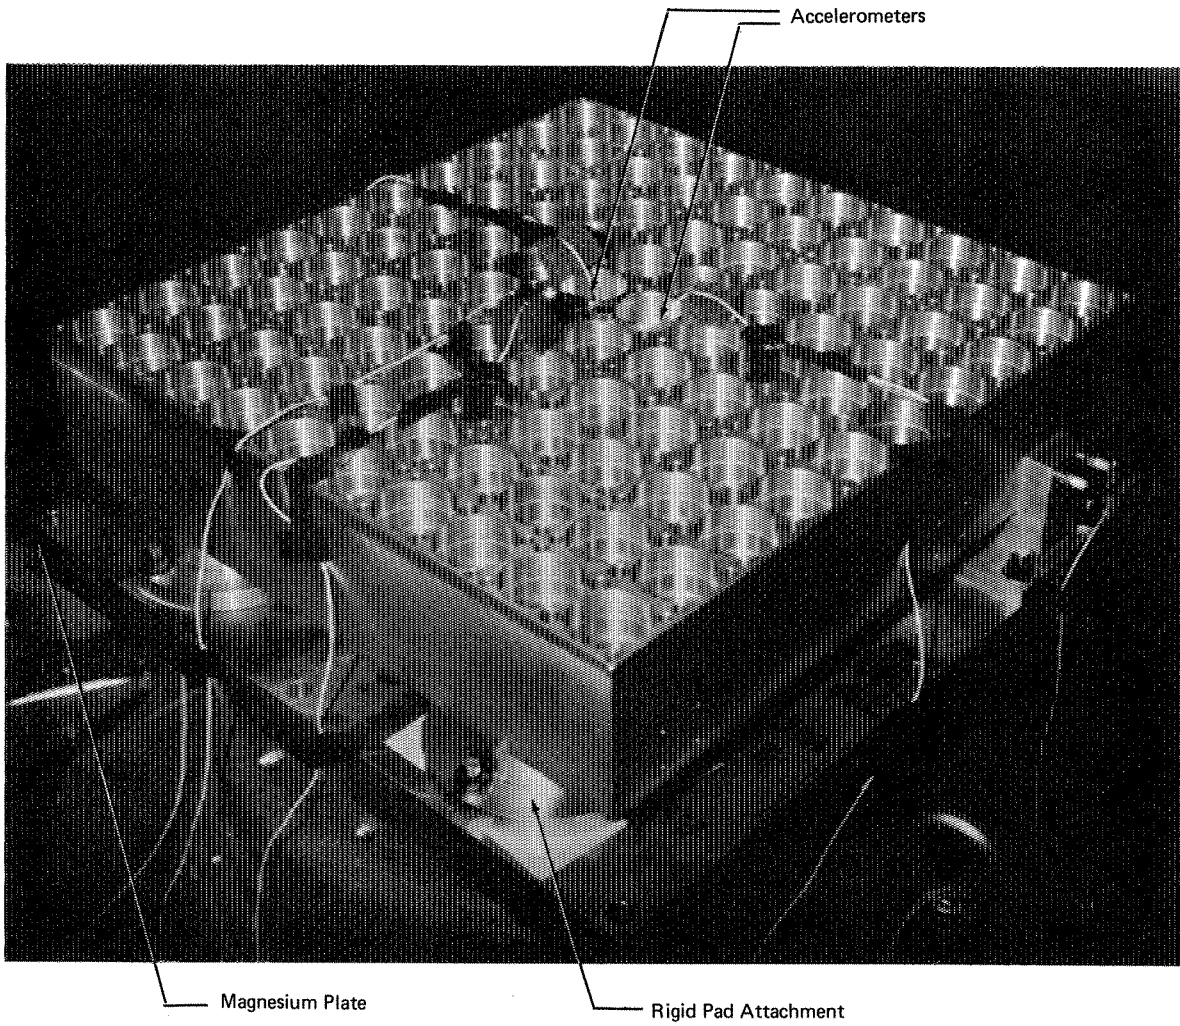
ETM ON MECHANICAL TEST FIXTURE
